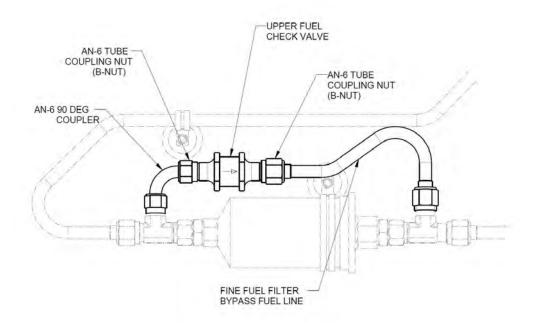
UPPER FUEL CHECK VALVE SUBASSEMBLY
